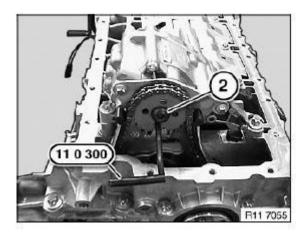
Identifying Special Tool (11 0 300) On Oil Pump Courtesy of BMW OF NORTH AMERICA, INC.
